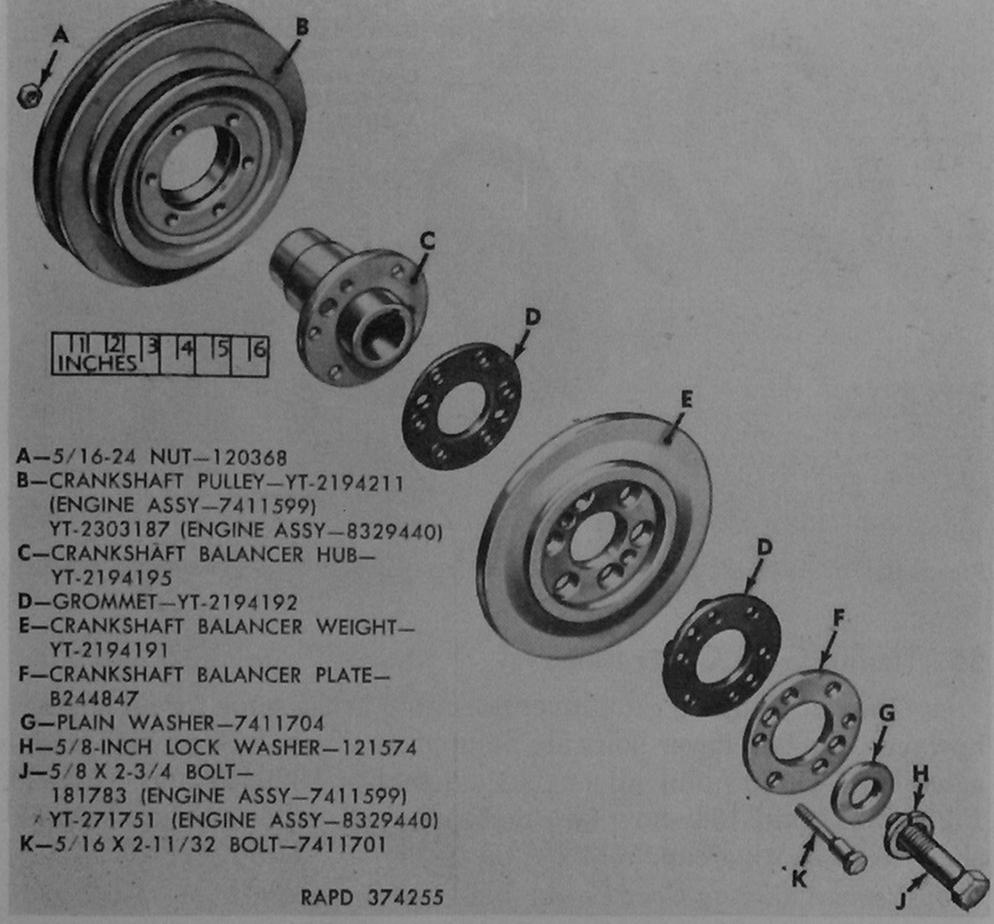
Crankshaft pulley and balancer components—engine assemblies 7411599 and 8329440.
